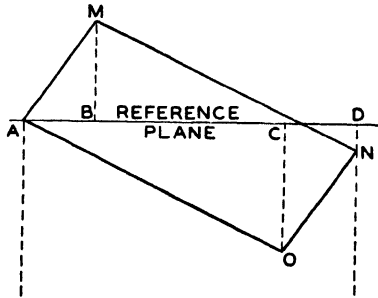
Auxiliary view of inclined face of block in Fig. 11b.
